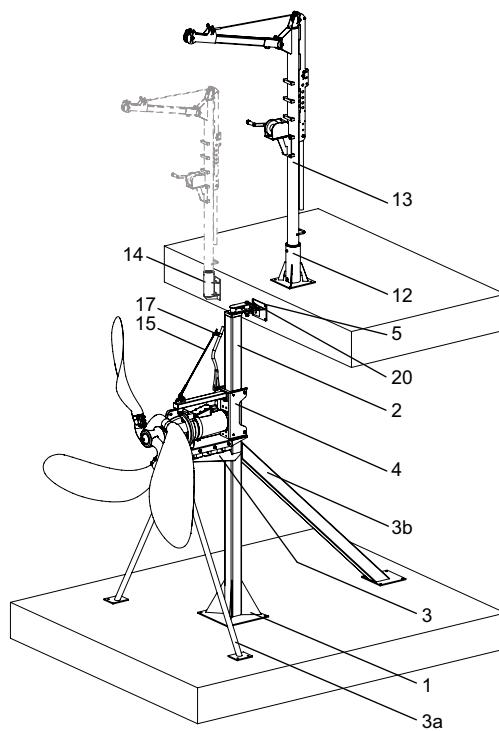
Installation drawing, SFG flowmaker installed on a column profile
